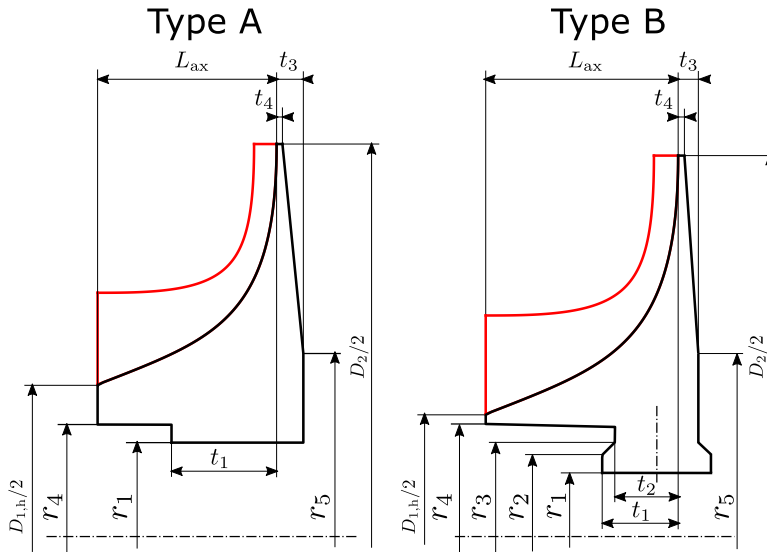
Sketch of the radial disk types A and B indicating major dimensions.
